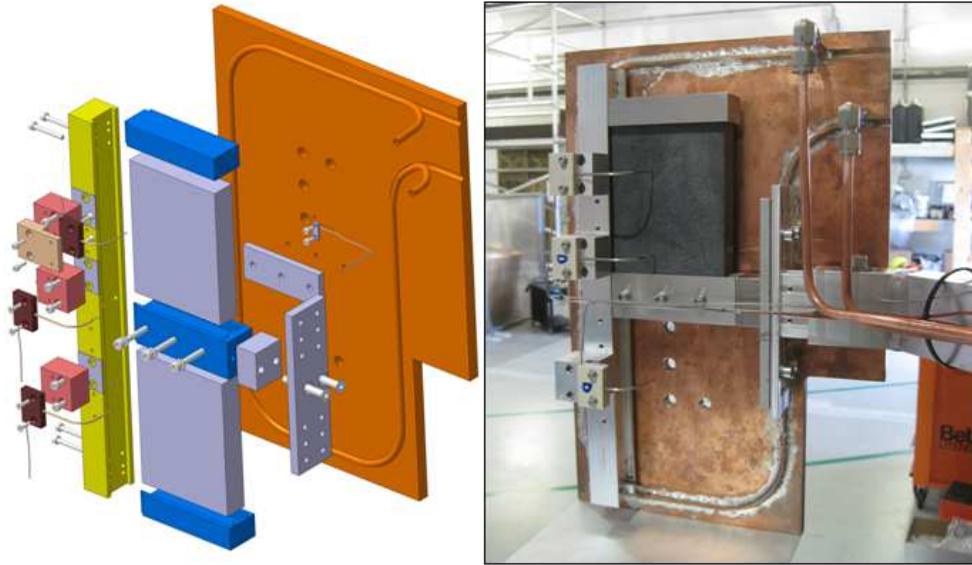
Exploded view of the mini-STRIKE (left); partially assembled system (one of tiles is missing).
